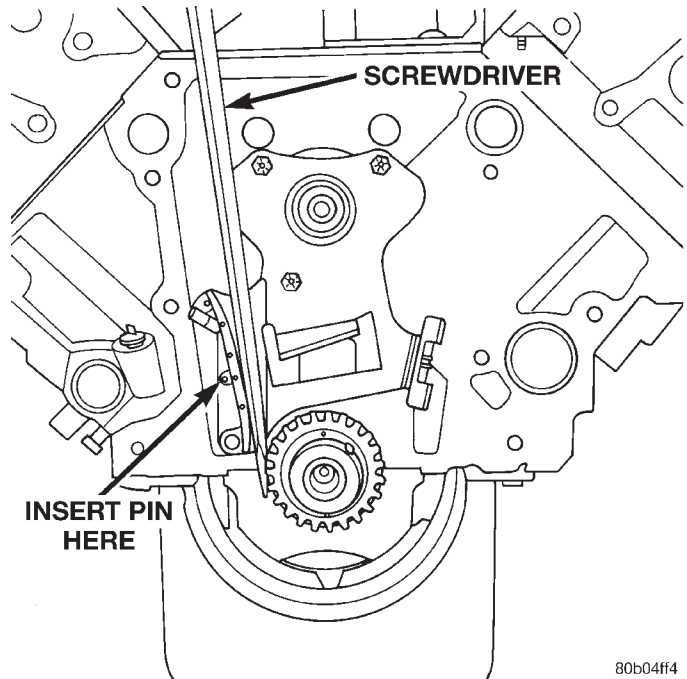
Compressing Tensioner Shoe For Timing Chain Installation
